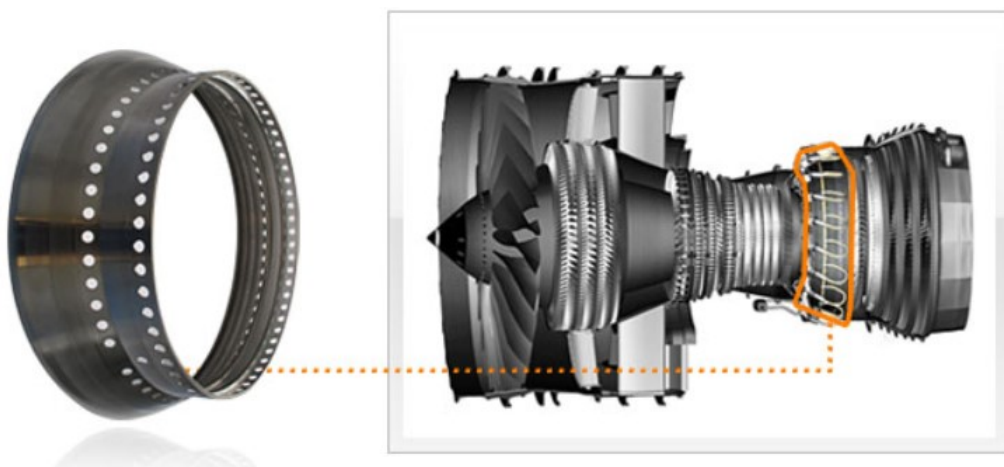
Illustration of a high-tech assembly combustor which is made by Inconel and other superalloys (Chaheng, 2020).
